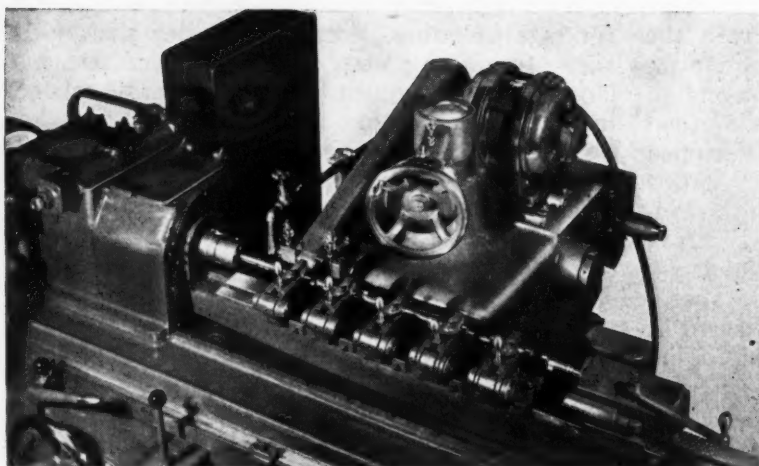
Hydraulic Cam Grinder Adapted to Grind Concave Type Cams with a Small Wheel
